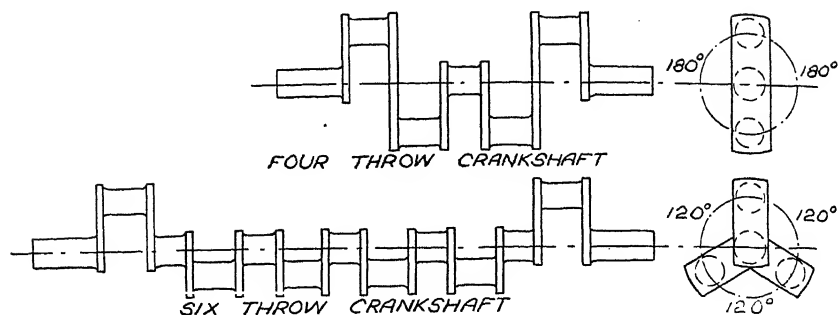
B.—SHOWING TWO TYPES OF CRANKSHAFT.
